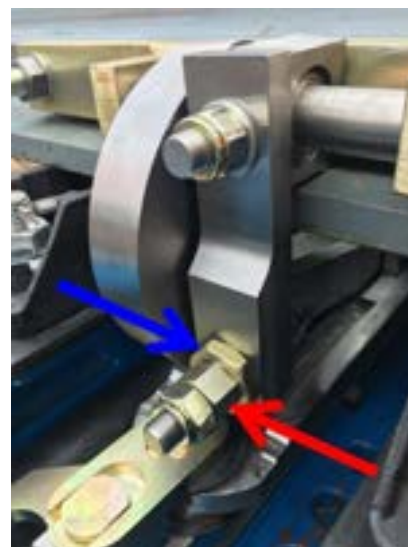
IBCL Mk 3 Adjusting Screw (red). Inner lock-nut (blue). Adjustment made from 4' side
